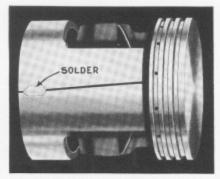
End of Slot in Piston Skirt Soldered to Prevent Spreading When Machining
